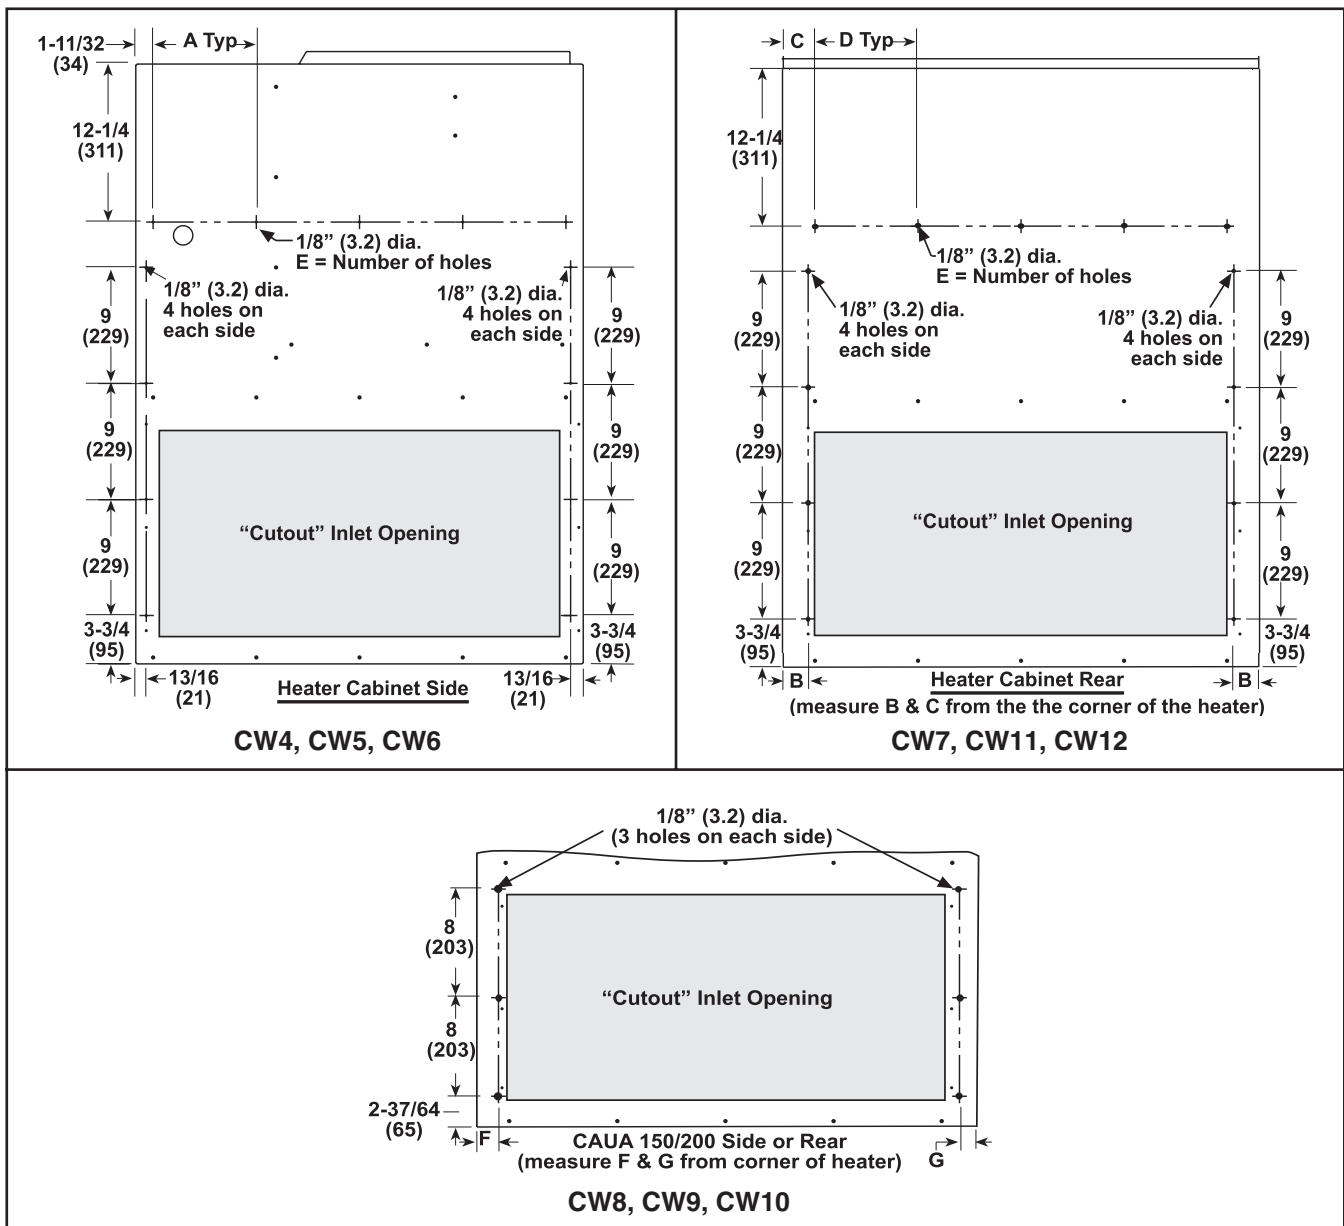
Mounting Holes and Dimensions (Refer to [Table 9](#))
